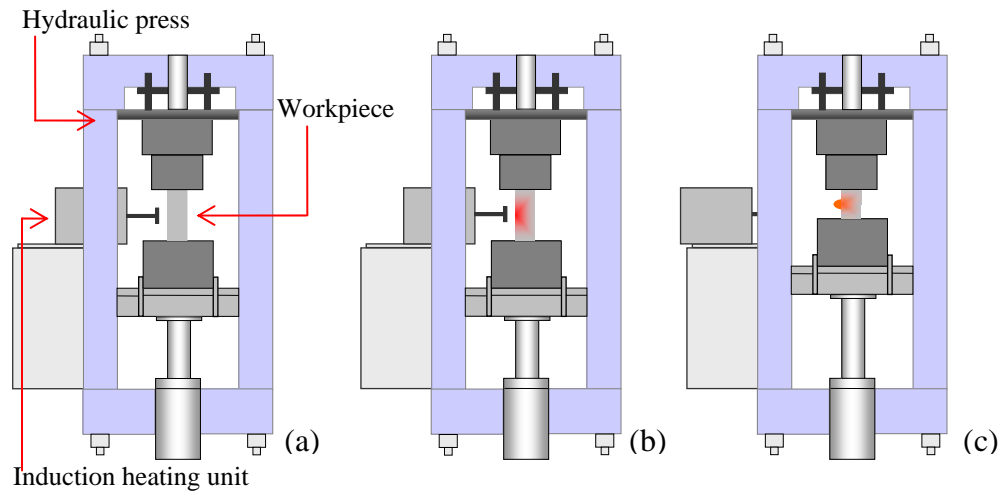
Schematic representations of the process steps: Positioning of the workpiece (a), induction heating (b), free forming (c).
